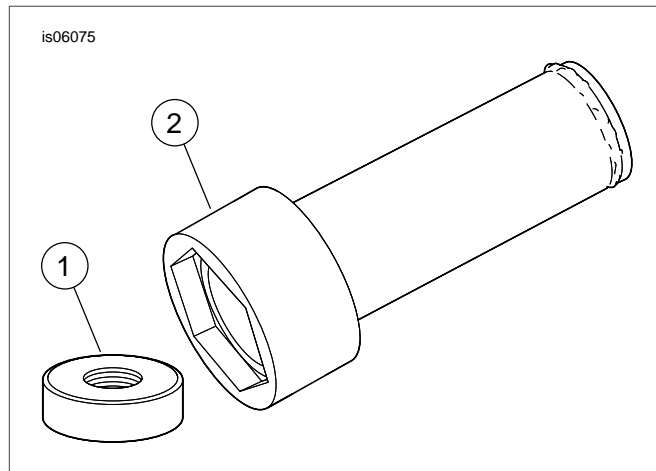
Service Parts: Mainshaft Sprocket Locknut Wrench and Pilot
